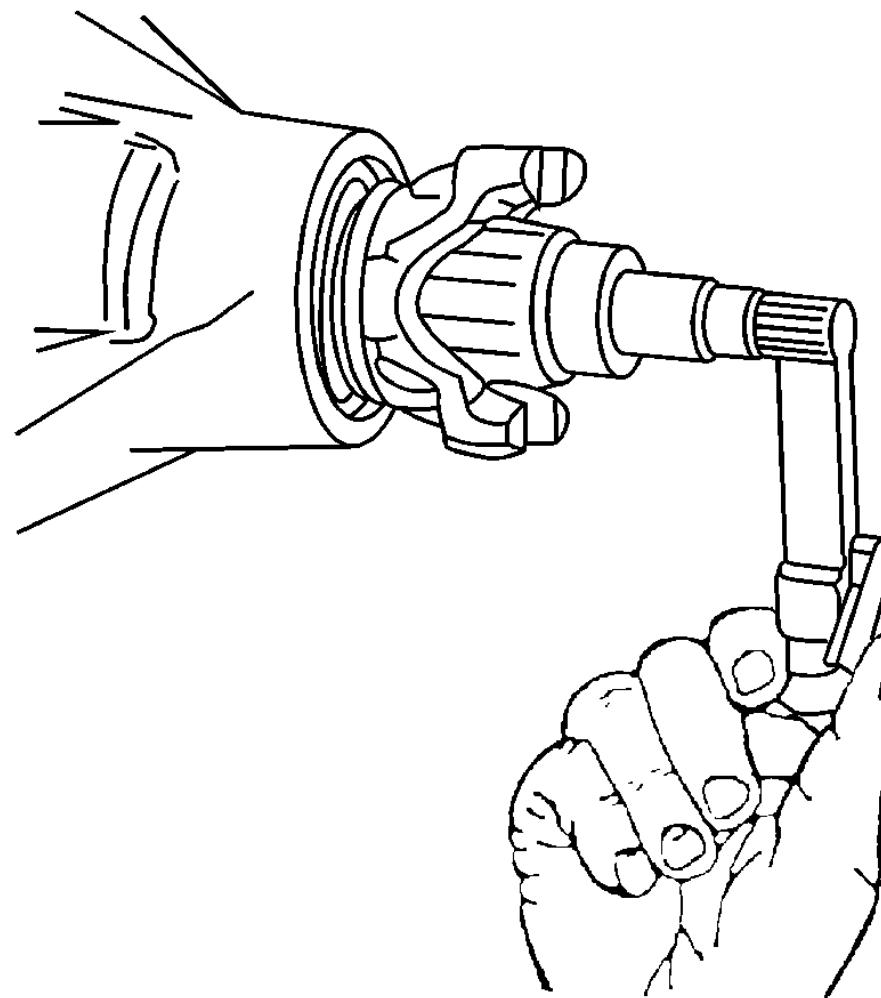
Measuring Pinion Rotation Torque - Front Axle
